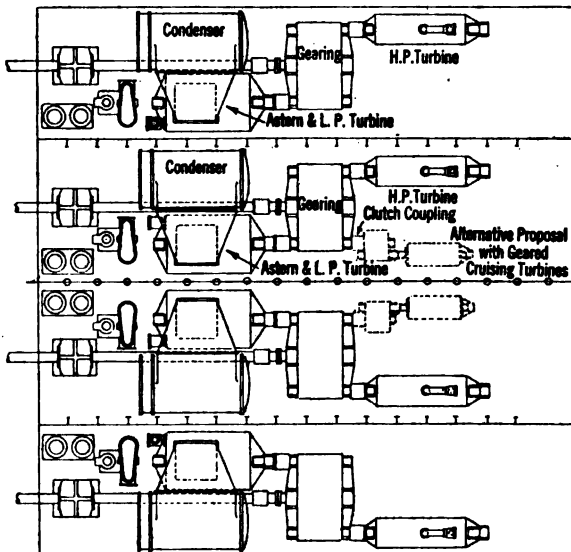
PROPOSED ARRANGEMENT OF GEARED TURBINE MACHINERY ON U. S. BATTLESHIPS
